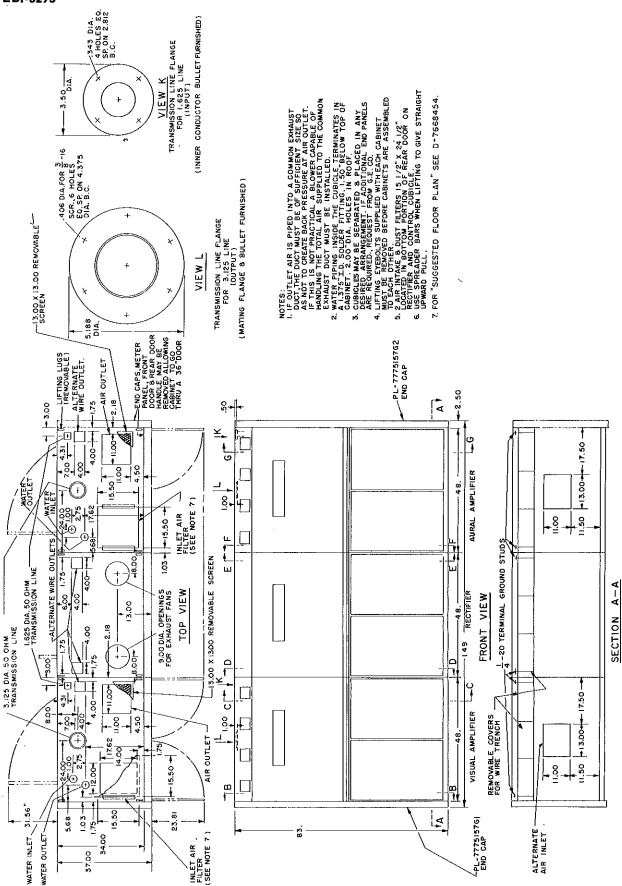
Outline Drawing: Over-all Physical Dimensions
